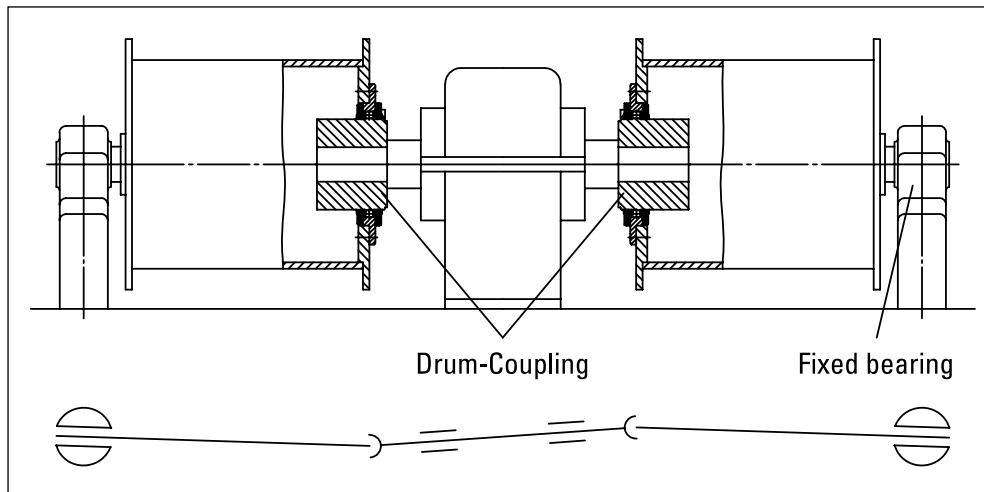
Layout of a twin-drum drive with a Drum-Coupling.
